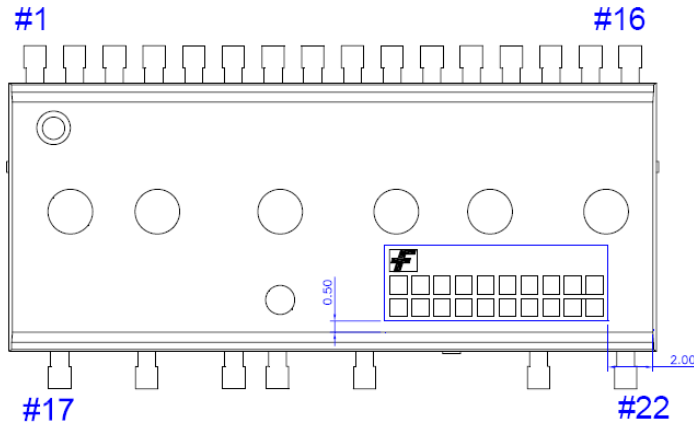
Marking layout of Package SPM23-AA type (bottom side)
